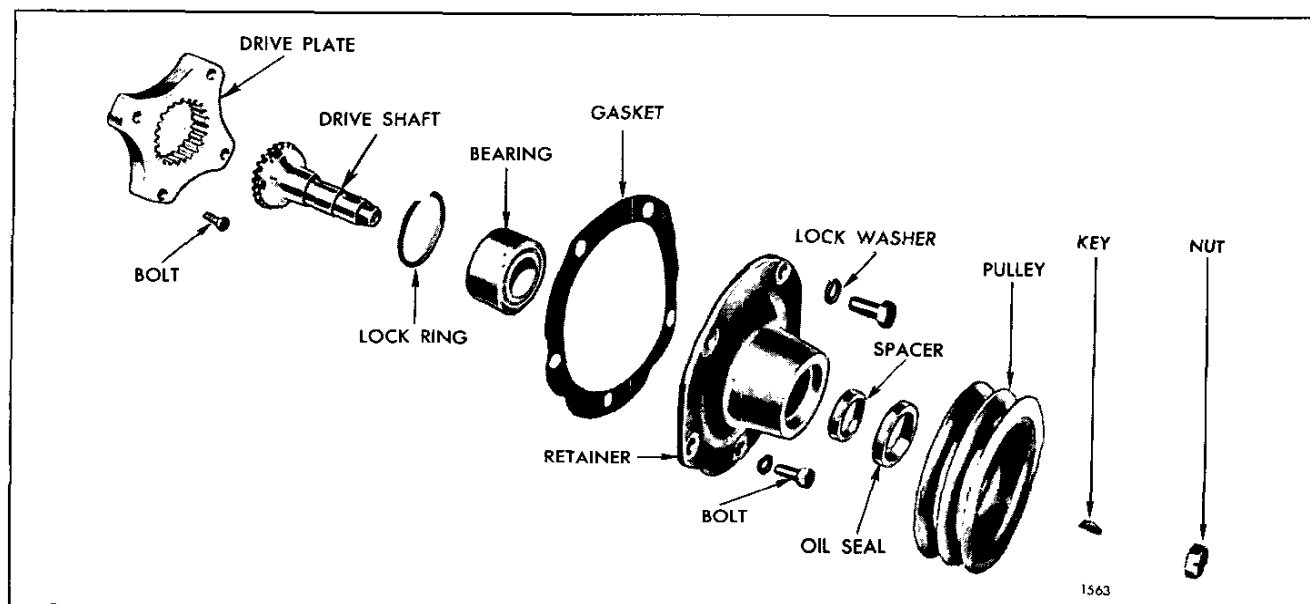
Components of Accessory Drive for Belt-Driven Accessory (Drive Plate Type)
